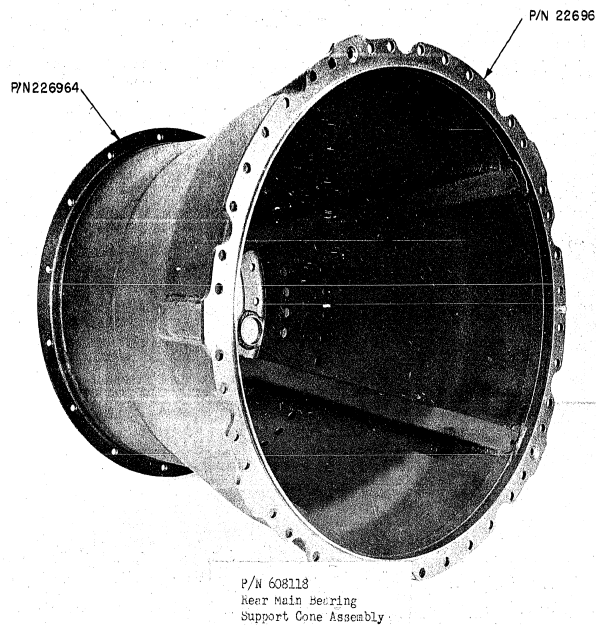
REAR MAIN BEARING SUPPORT CONE ASSEMBLY
